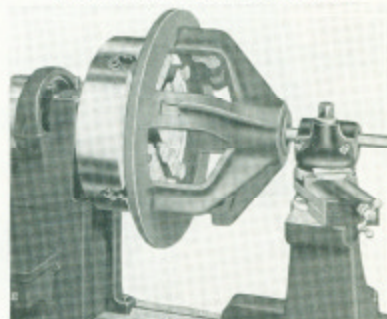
Boring a bearing of a heavy cast iron motor housing held in a 4-jaw independent lathe chuck mounted on spindle nose of lathe.
